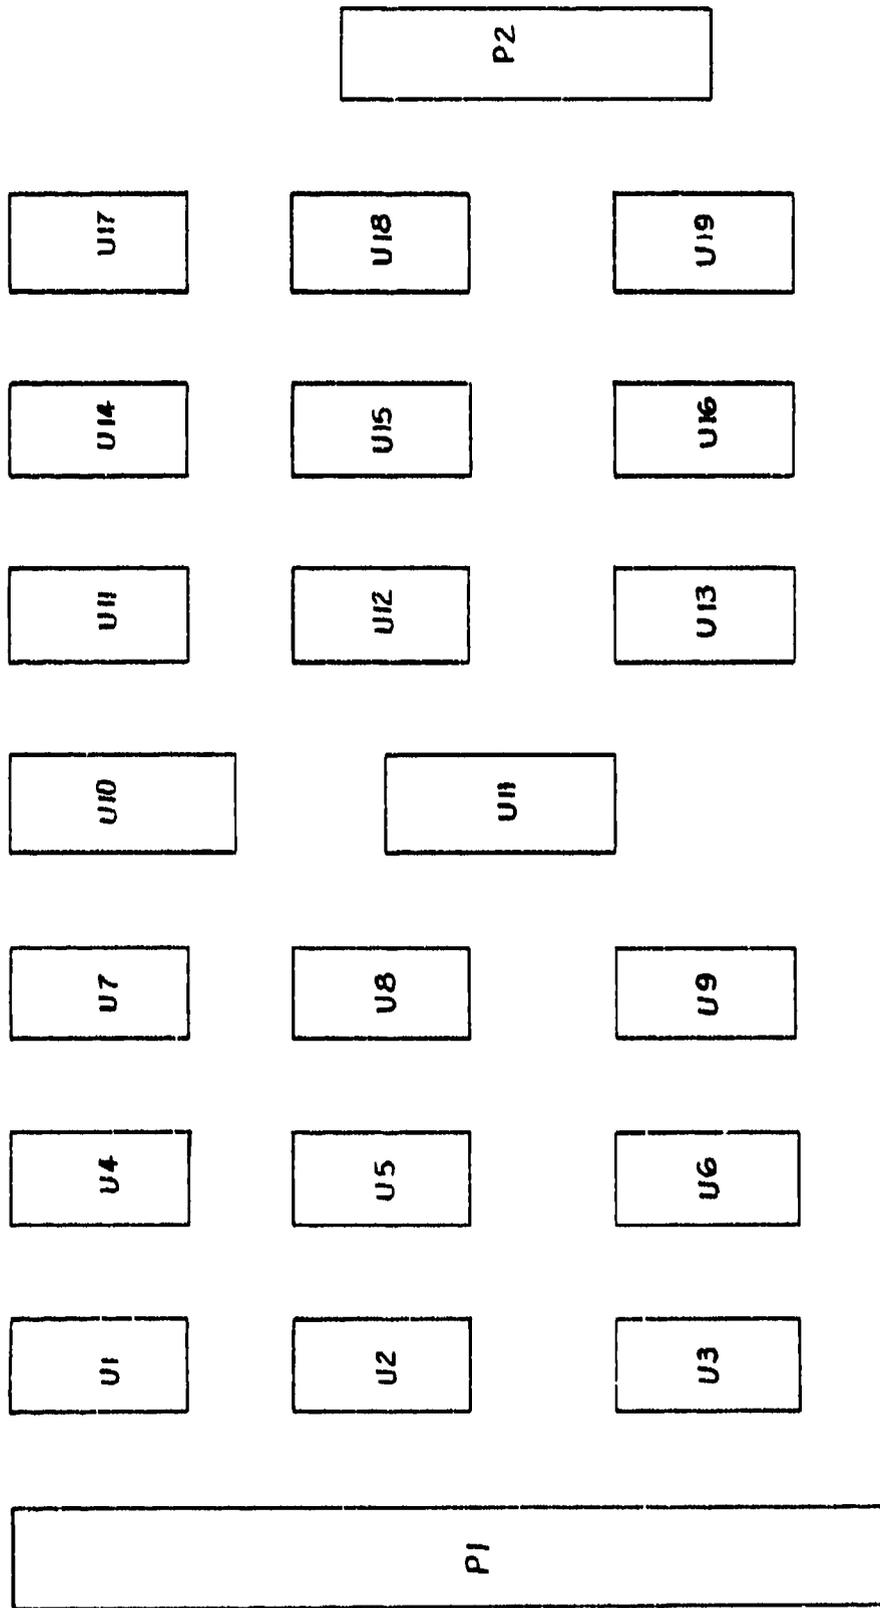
Assembly Drawing of Parallel Output Board (wire-wrap side up)
